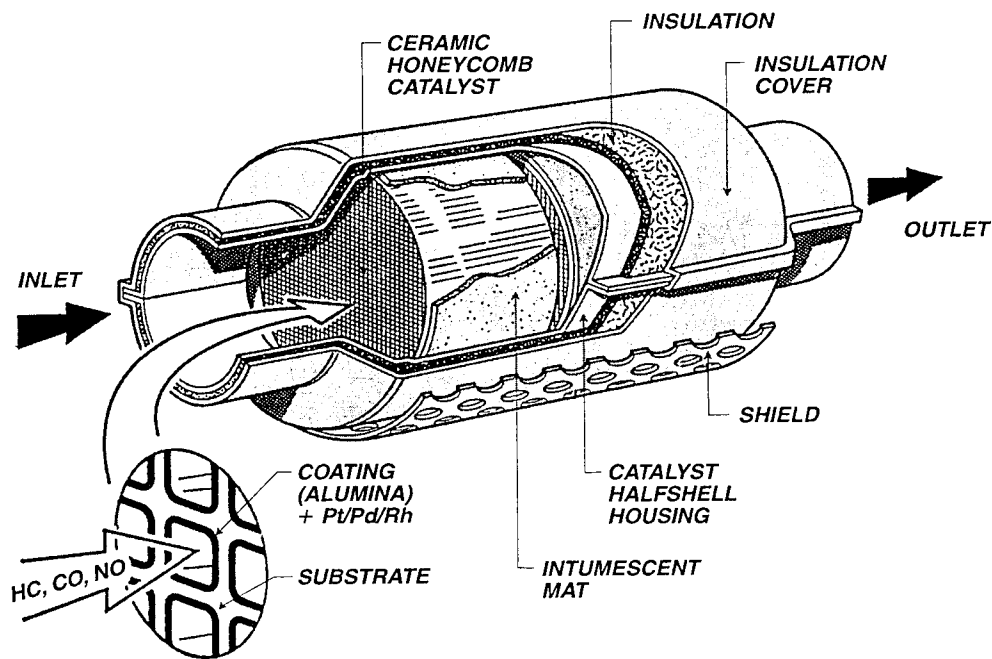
Catalytic Converter components. Courtesy Englehard Corporation ^[6]
